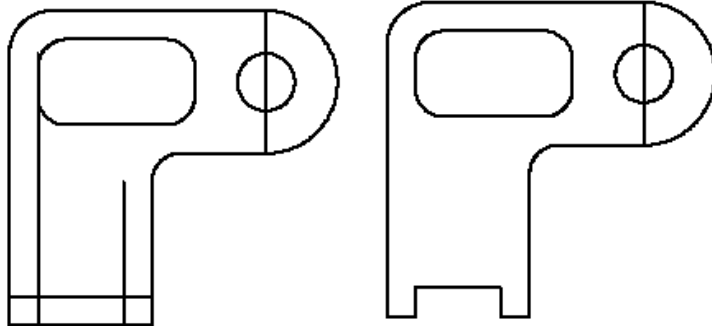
Figure Step 8Step 8 Using the FILLET command, insert a 0.5 radius fillet on all four corners. (Figure Step 8)
